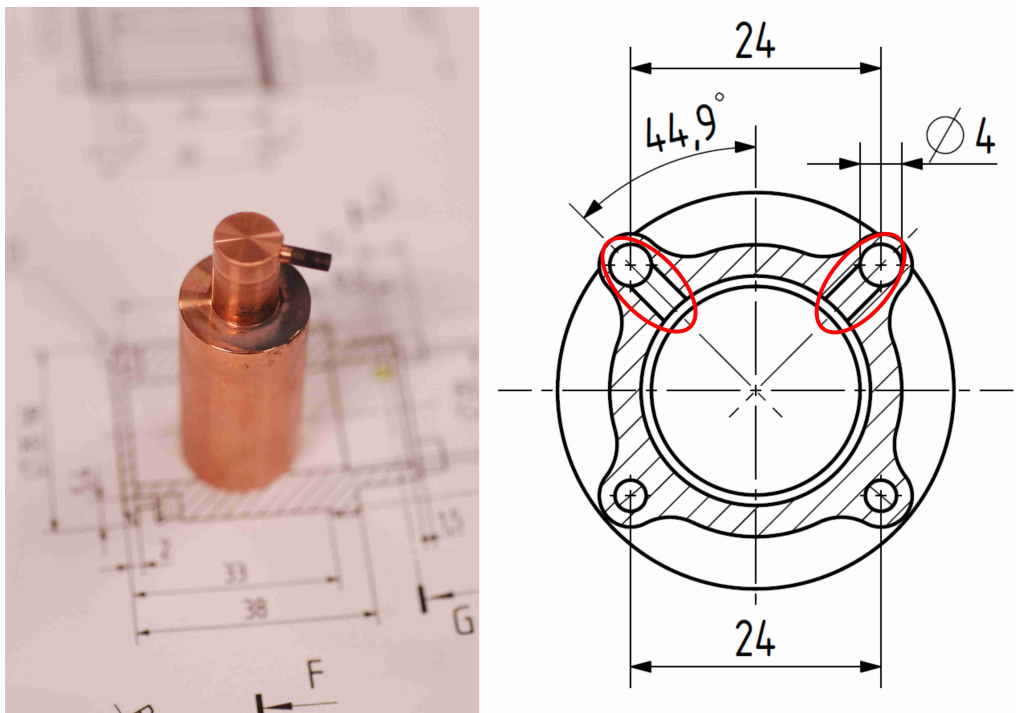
Photograph of copper cathode used for the sink erosion of radial connection holes to the moderator volume (left) and front cut view of a technical drawing of the moderator vessel with radial connection holes marked in red (right).
